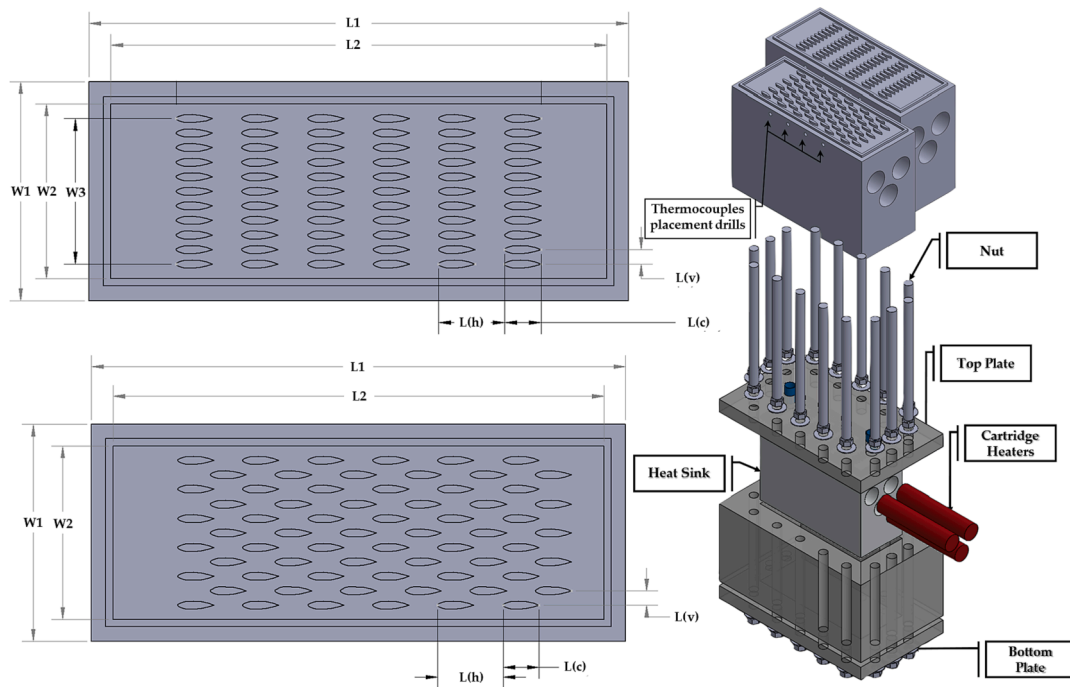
Heat sinks geometrical configurations, exploded view, and assembly.
